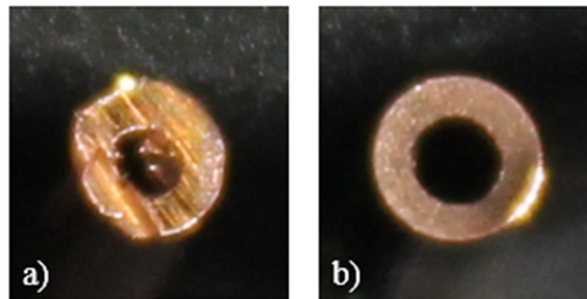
Cross section area after the cut test: a) with thin saw blade; b) with EDM machine.
